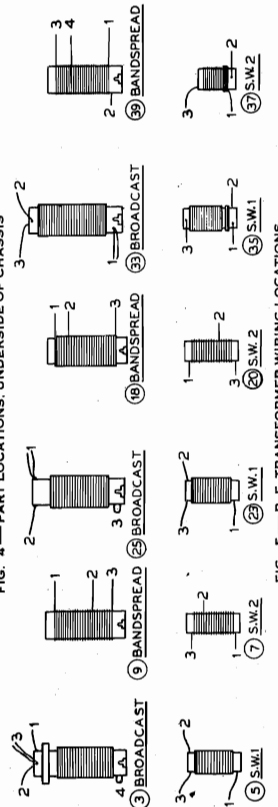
R. F. TRANSFORMER WIRING LOCATIONS
